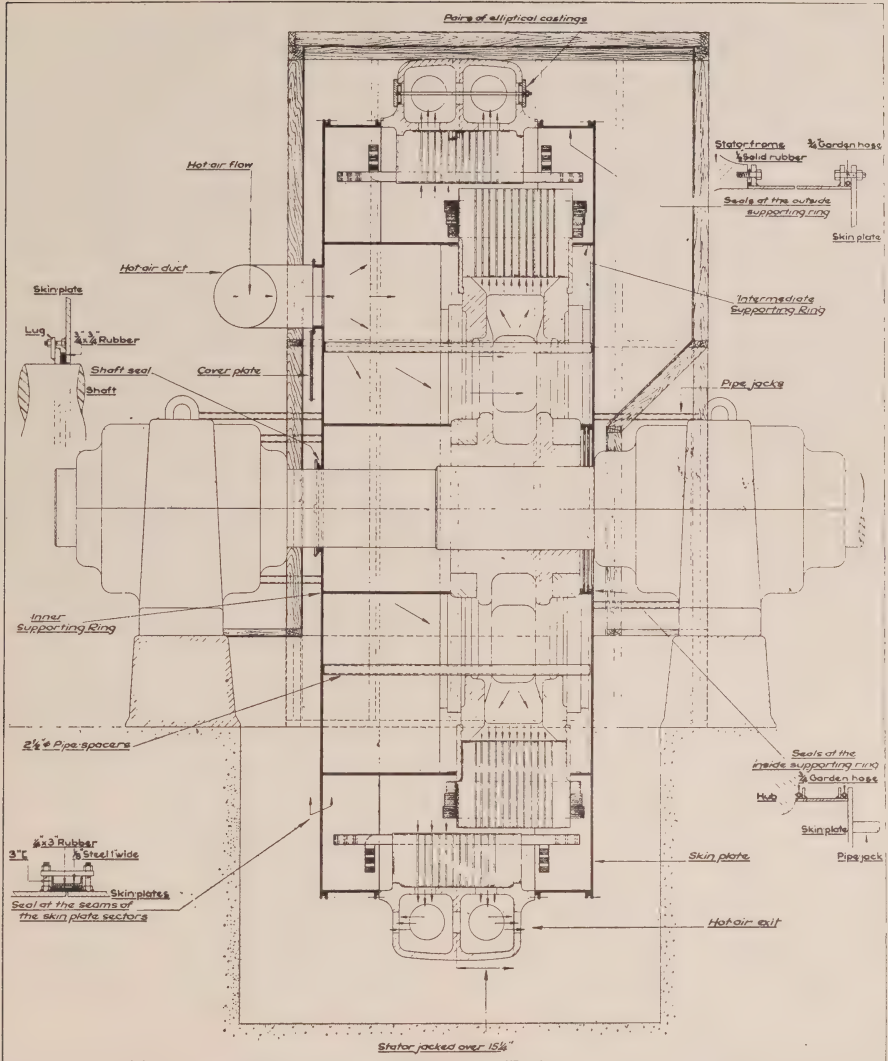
Details—Vacuum chamber and drying enclosure—Side View.
